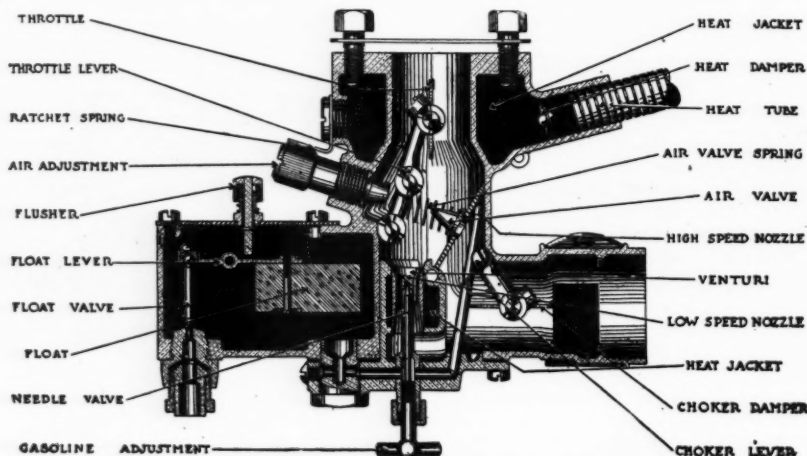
Marvel carburetor used on Buick. This carburetor has a low and high speed nozzle
